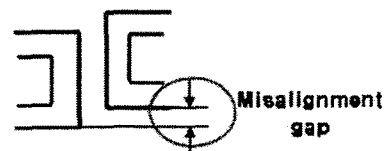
Cross-sectional schematics of misalignment of welded PE pipes
